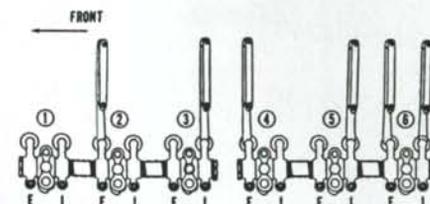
With No. 1 piston on TDC exhaust stroke on six-cylinder engines, adjust exhaust valve on No. 2 cylinder, intake valve on No. 3 cylinder, exhaust valve on No. 4 cylinder, intake valve on No. 5 cylinder and intake and exhaust valves on No. 6 cylinder.
